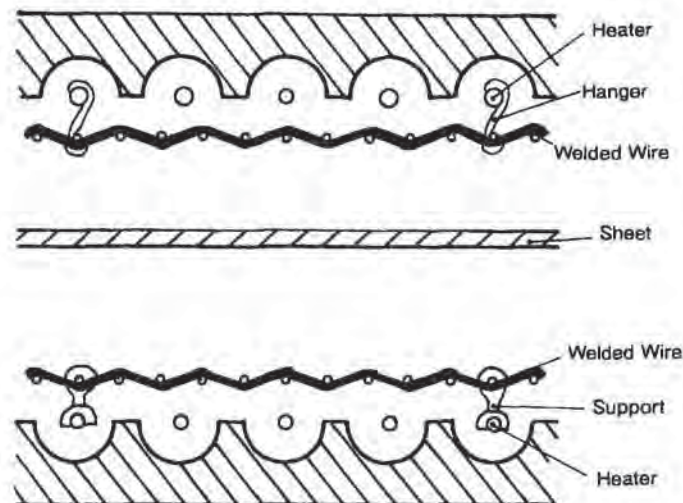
Examples of attaching welded wire screen for pattern heating on rod heaters
